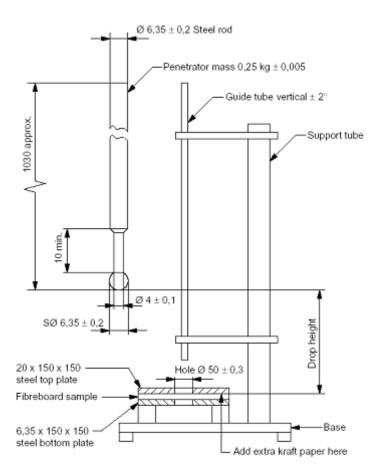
Test fixture for corrugated fibreboard penetration test
